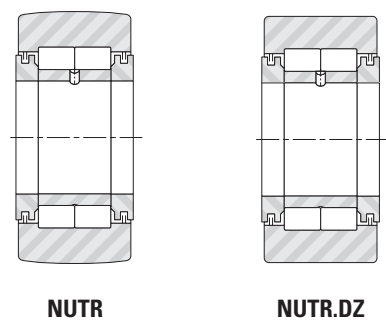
Yoke-type track rollers with end washers, full complement of cylindrical rollers
